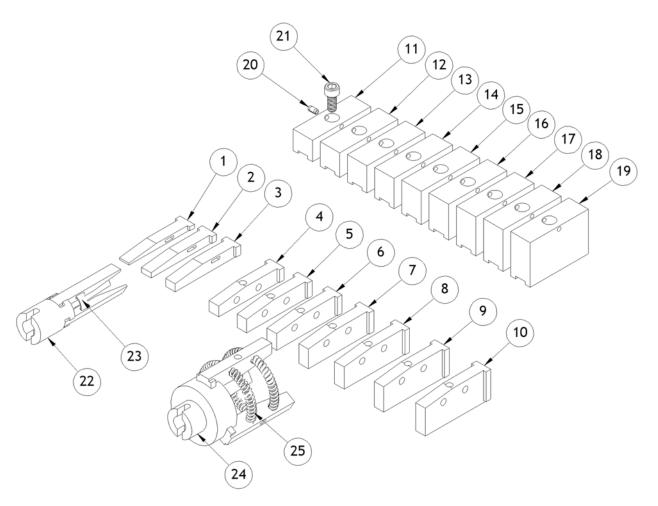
BG38E110-R BOILER GUN ELECTRIC ASSEMBLY (P/N 102987)
